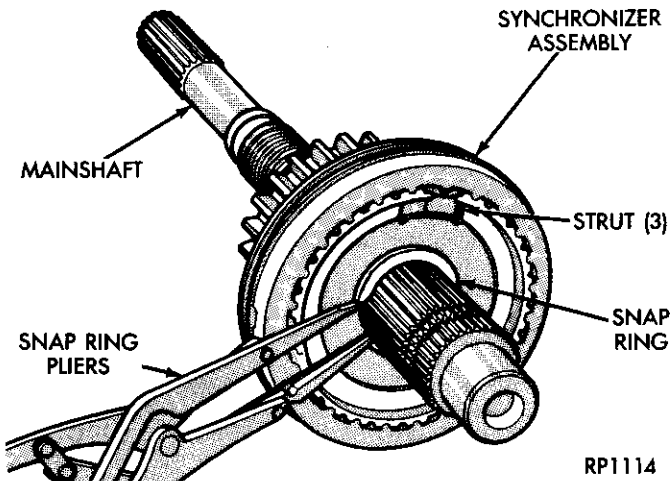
Synchro Hub Snap Ring Removal/Installation
